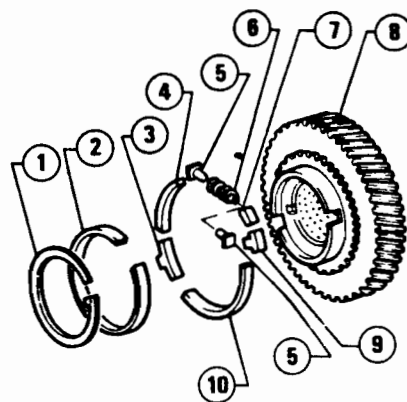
Later type 1st/2nd synchro unit (Sec 8)
